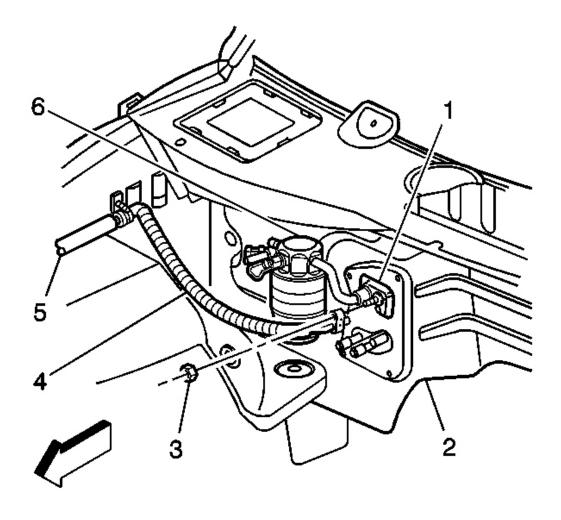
Locating Evaporator Tube Components Courtesy of GENERAL MOTORS CORP.
